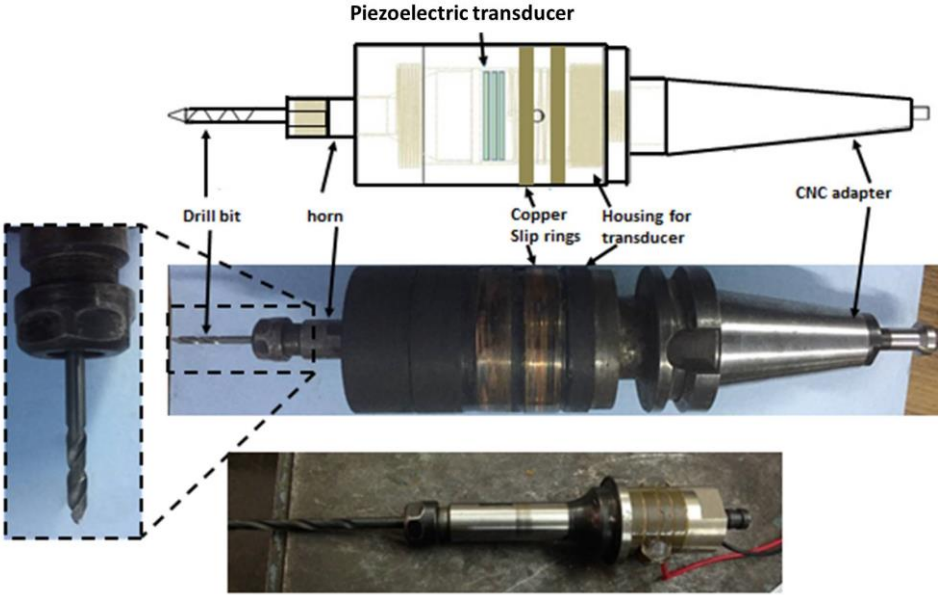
Developed ultrasonic-assisted drilling tool coupling of transducer and CNC Adapter
